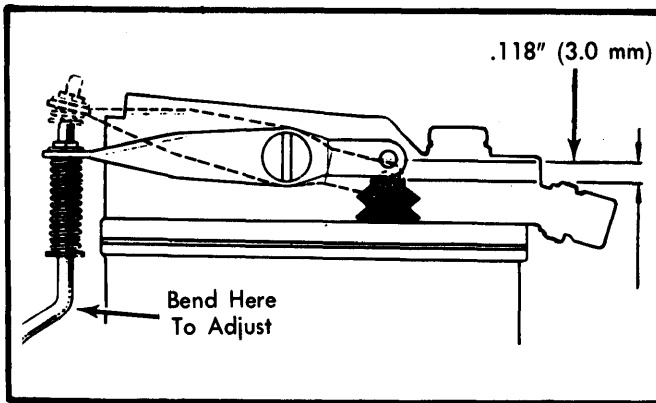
Carburetor Accelerator Pump Stroke Adjustment
